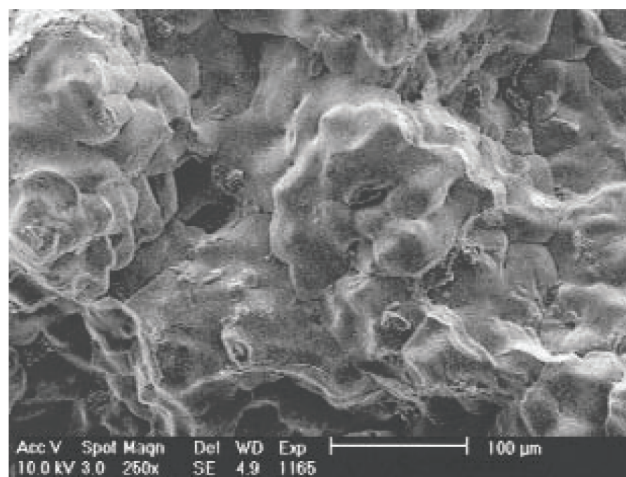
A typical part of the fracture shown in Figure 10 with dendrites pointing out of the surface.
